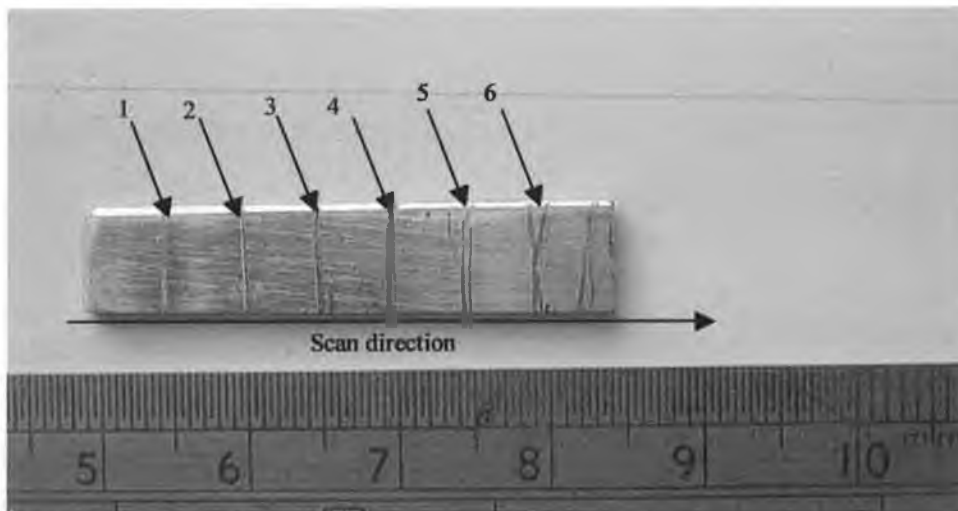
Photograph of the aluminium sample with six crevices as defects.
